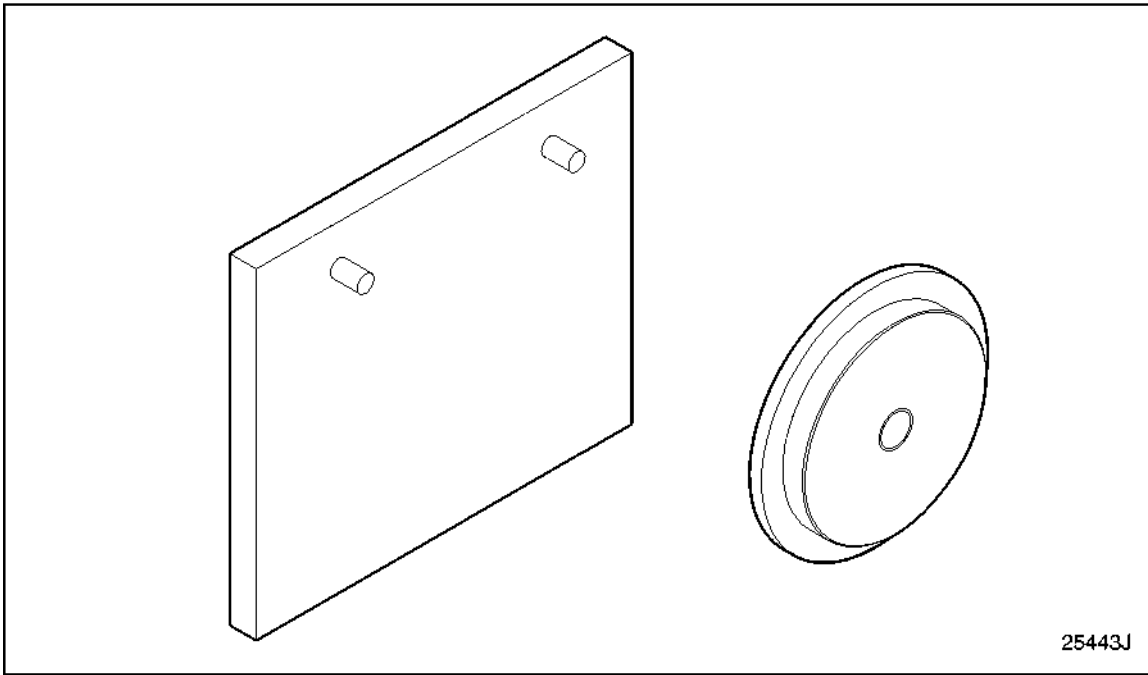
Front Crankshaft Seal REM/INST,J 41599
